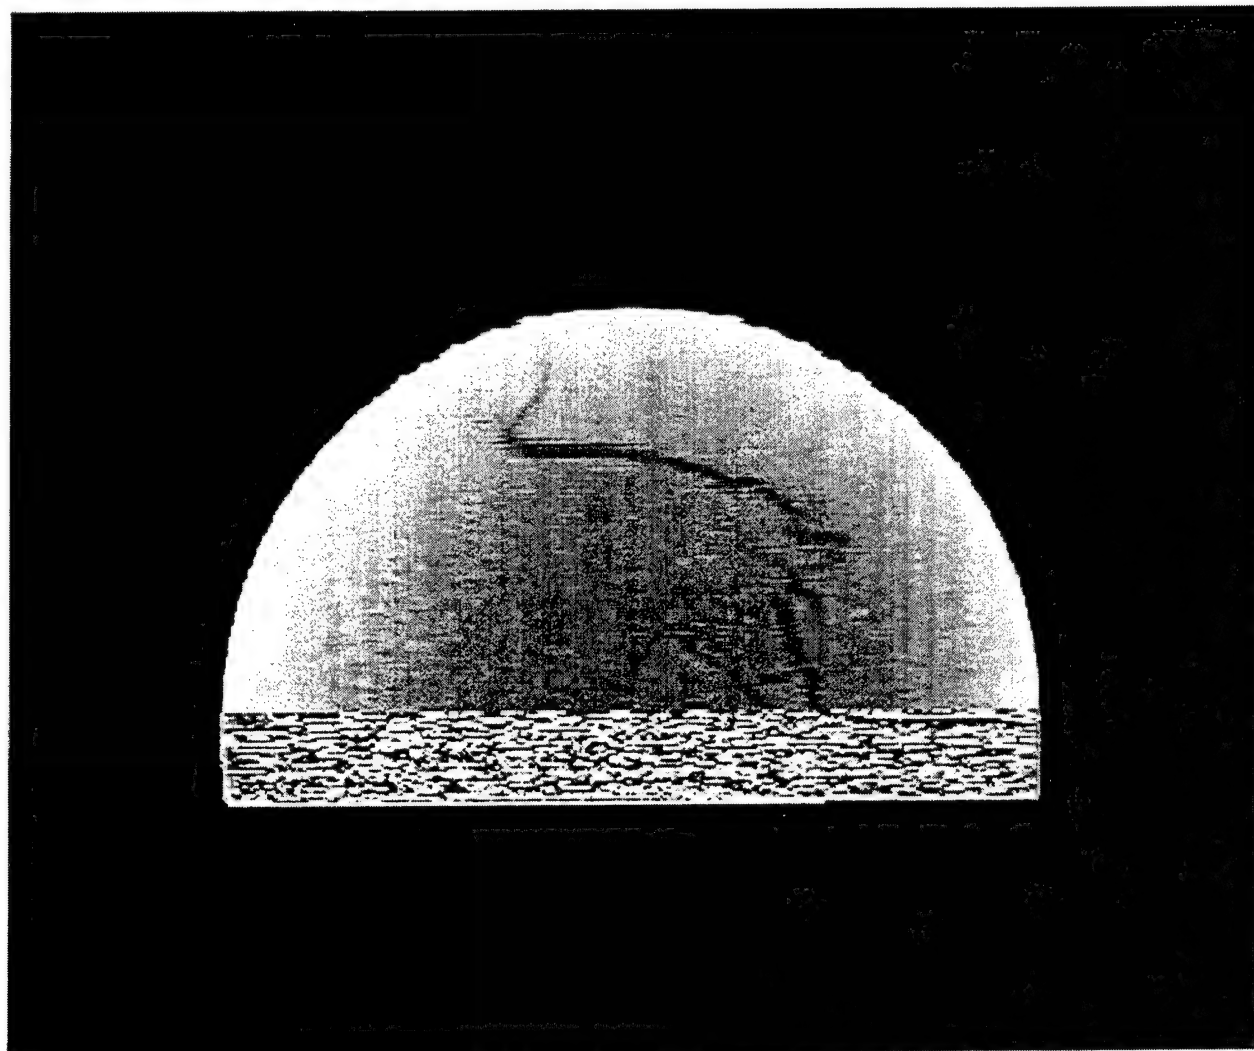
17.98 mm from bottom of disk with 65° rotation about X-axis.
